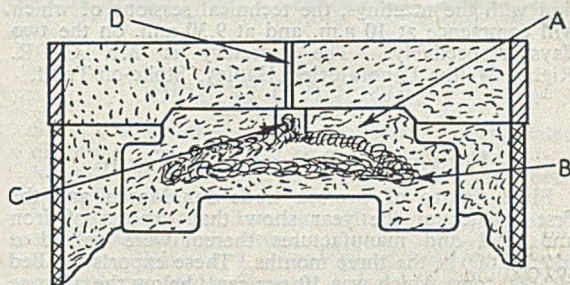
Part Cross-section through a Mould, showing a Large Core contained by the Top Part.
